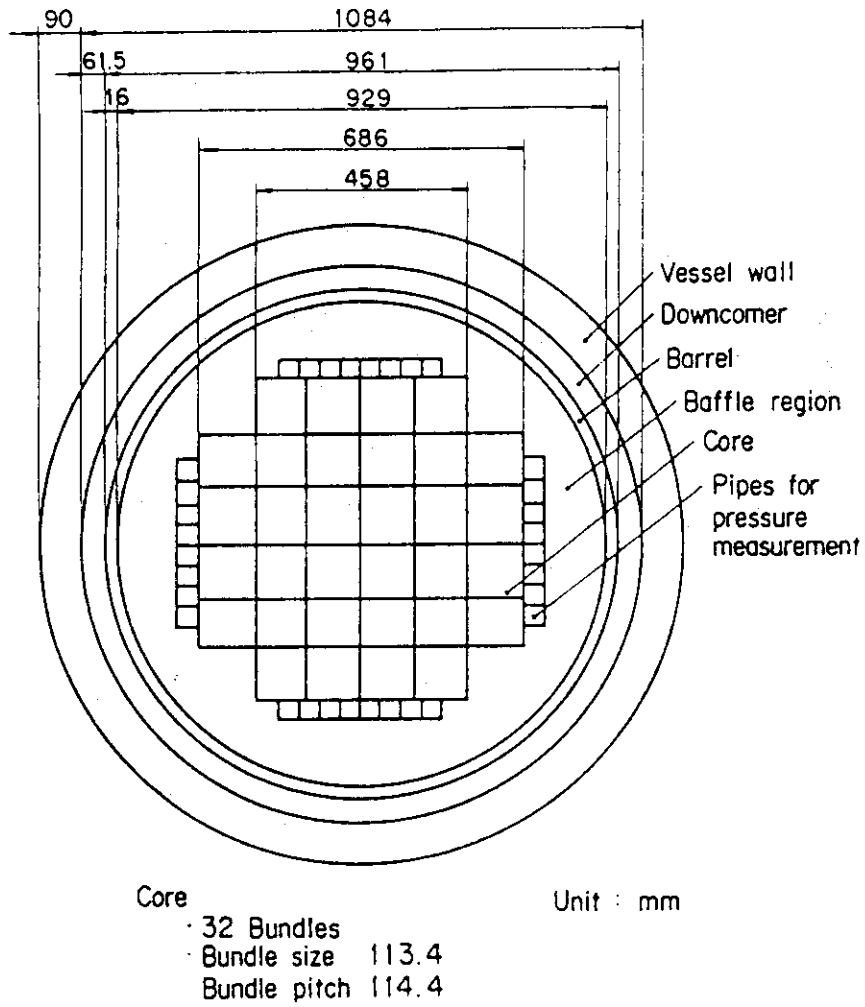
Dimension of CCTF Core-II pressure vessel cross section
